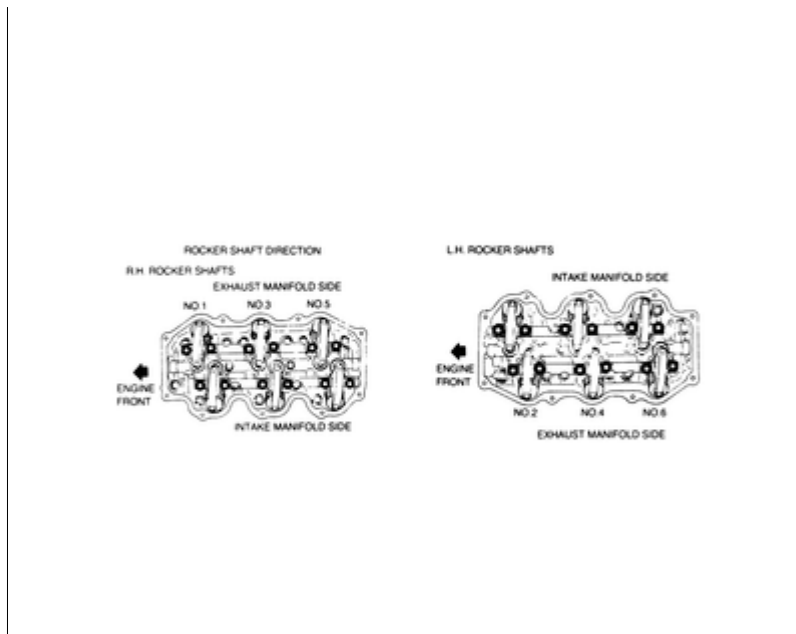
View of the rocker shaft installed — all 6-cylinder engines are similar
